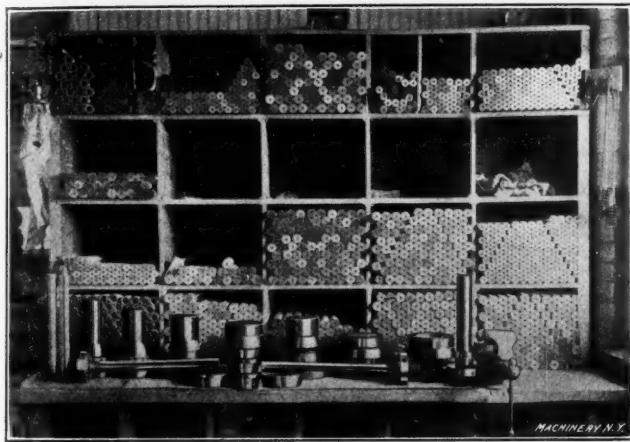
Rack of Cores and Set of Dies for the Tube Drawing
